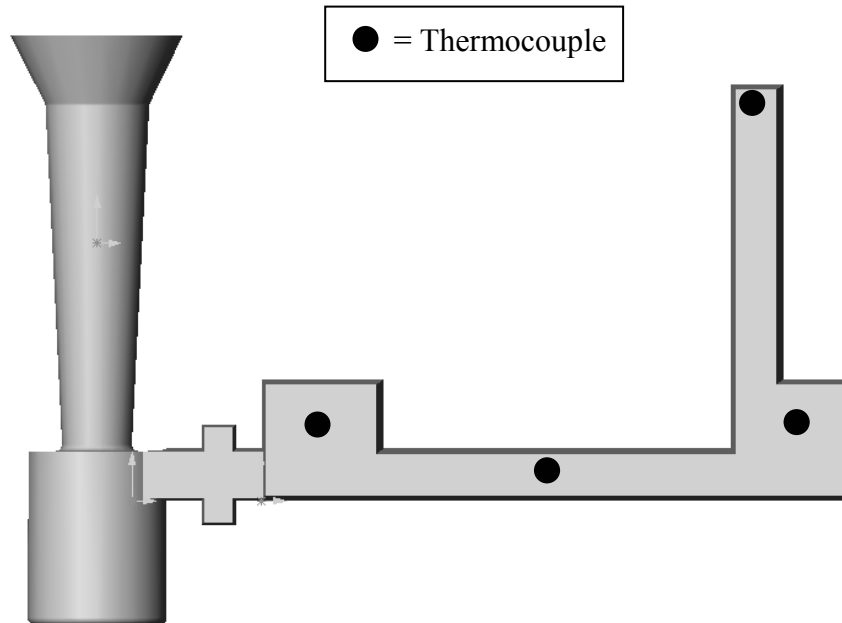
The positioning of the K-type thermocouples in the casting mould.
